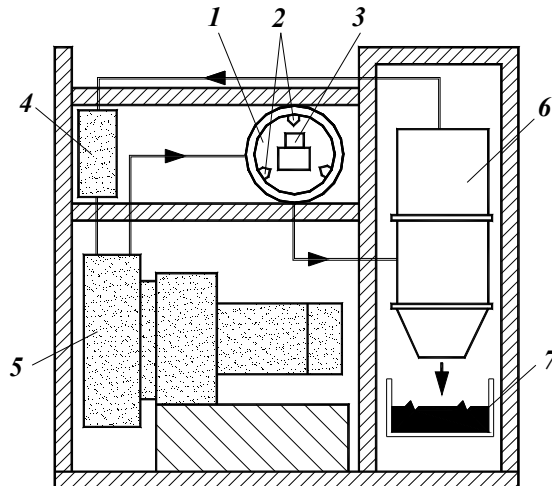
Schematic diagram of air stream cleaning installation: 1- work chamber, 2 – nozzles, 3 – machined part, 4 – air cooler, – compressor, 6 – filter, 7 – oil
